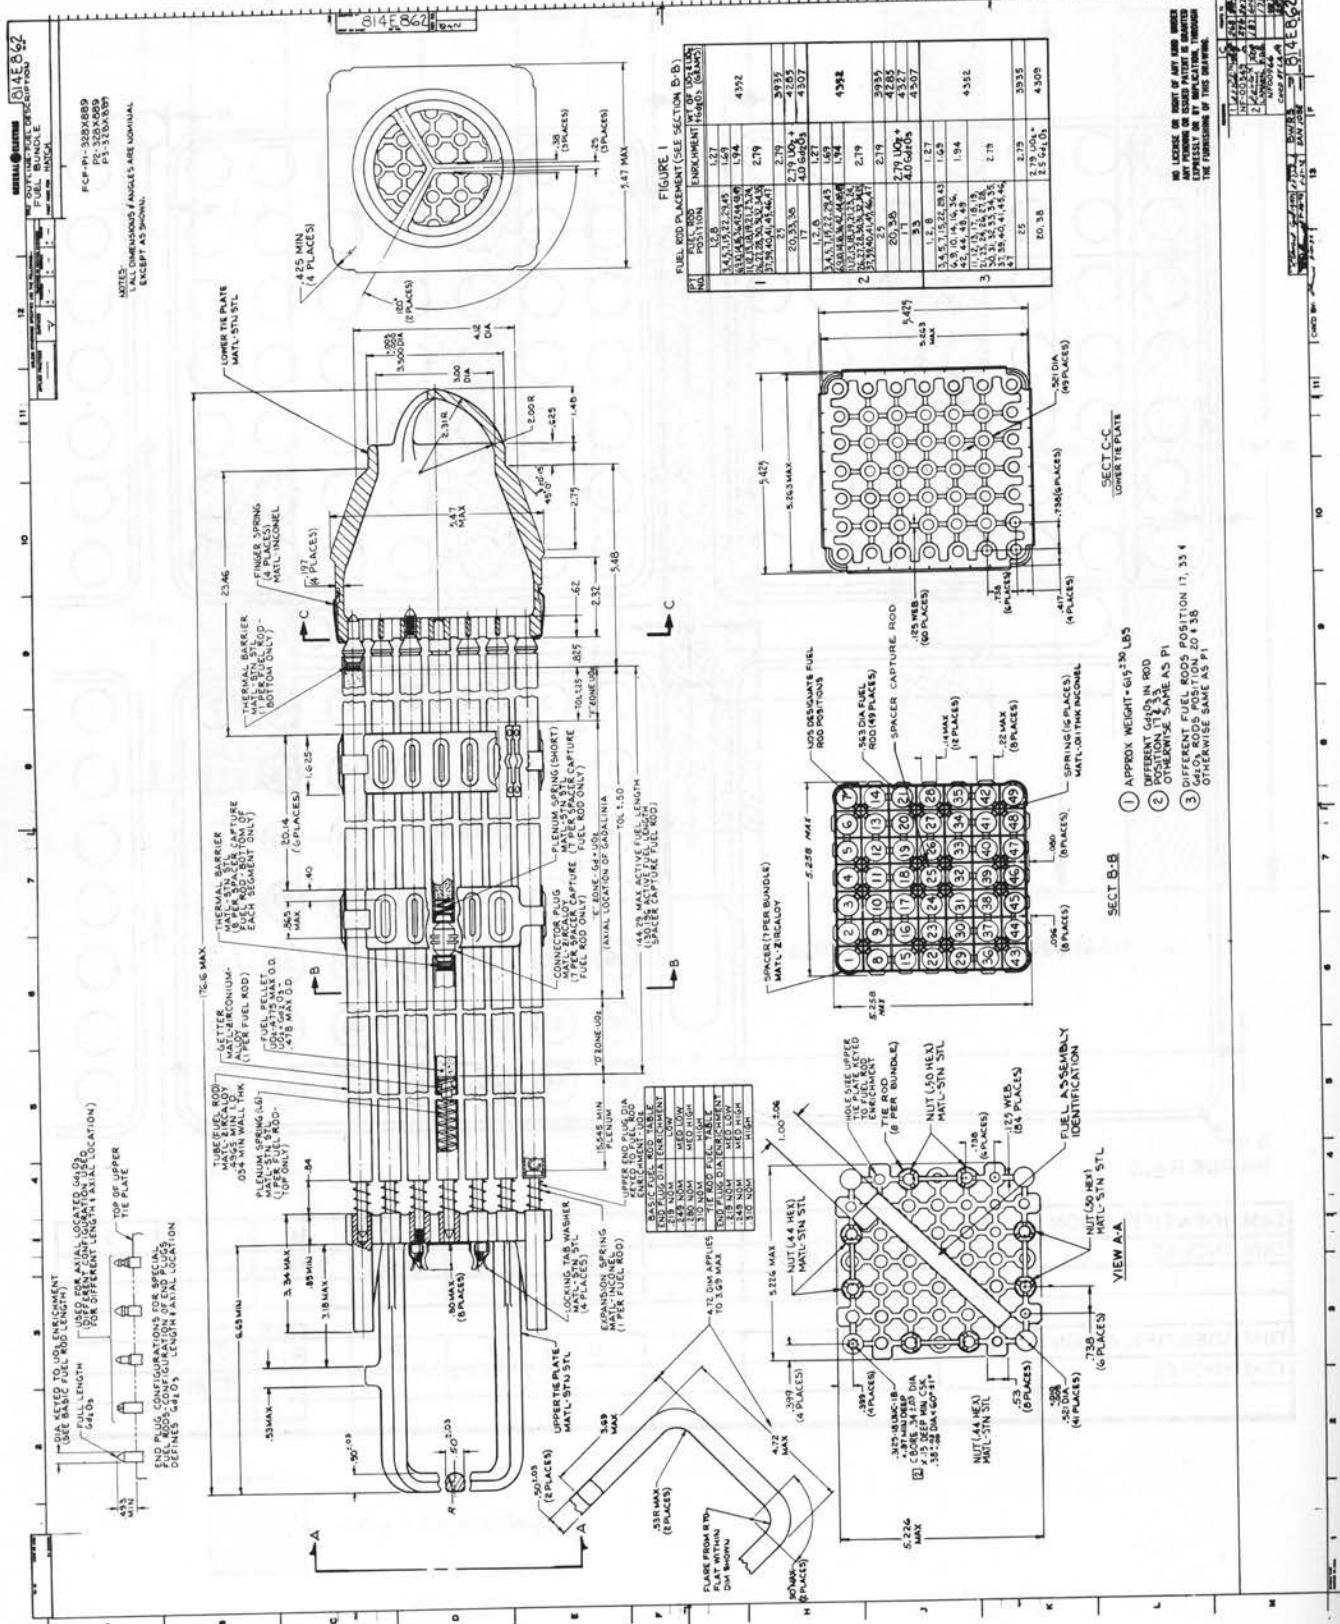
Fuel Assembly Drawing for Initial Core Fuel
